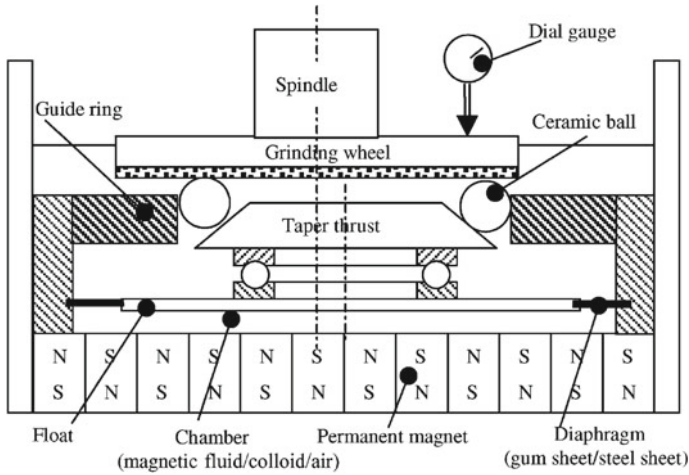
Schematic view of magnetic fluid support grinding machine of ceramic balls [10]
